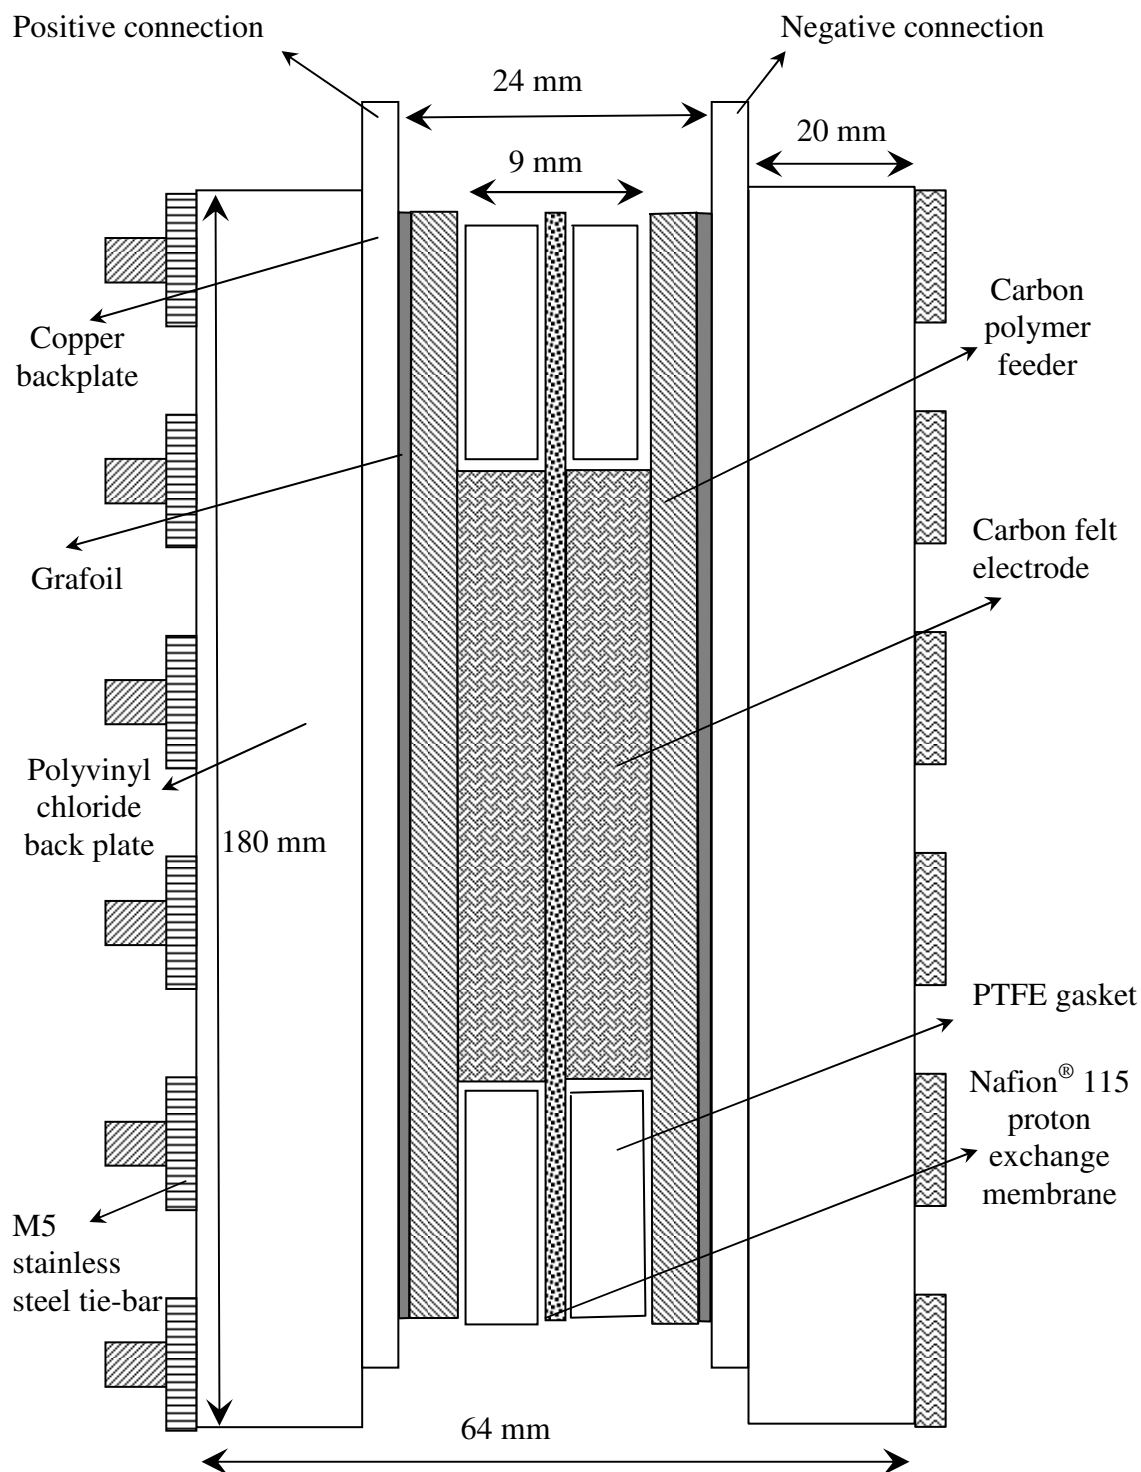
Vertical cross-sectional view of 100 cm<sup>2</sup> vanadium test cell.
